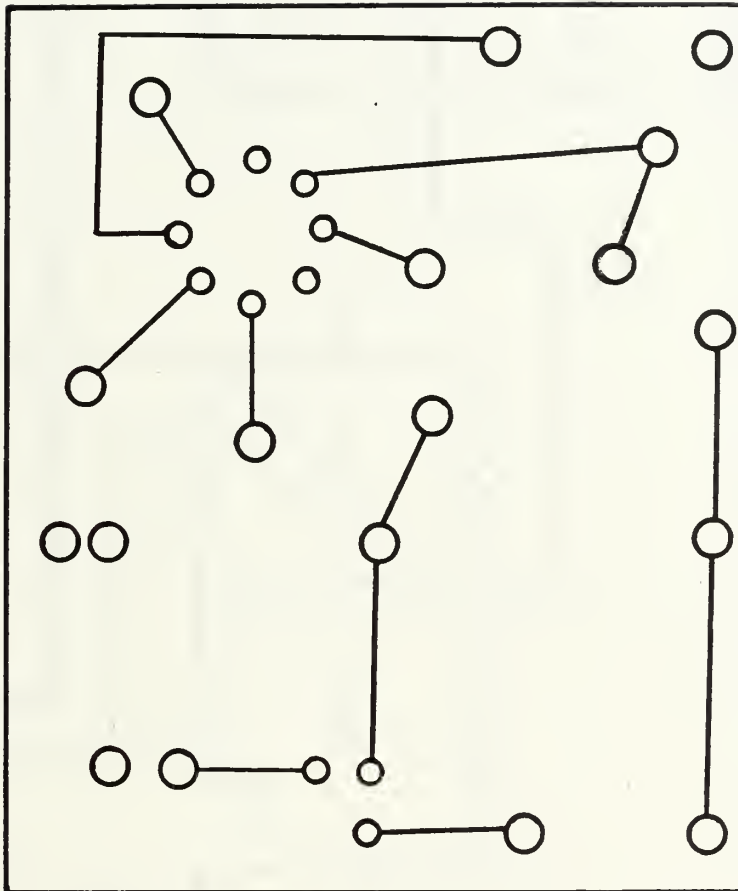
Printed Circuit Design Mask for the Converter Driver Components
